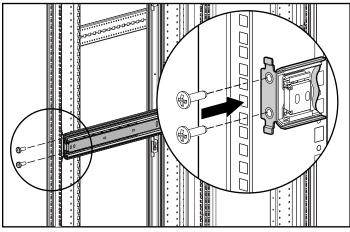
Attaching the front of the rack mounting bracket assembly
